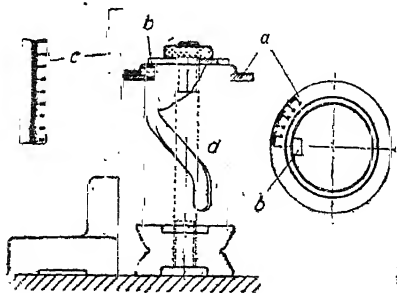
Simple testing device for cylindrical cams; *a*, ring slipped over cam, provided with roller and graduations; *b*, steel roller mounted in *a*; *c*, vertical rule; *d*, cylindrical cam to be tested.
